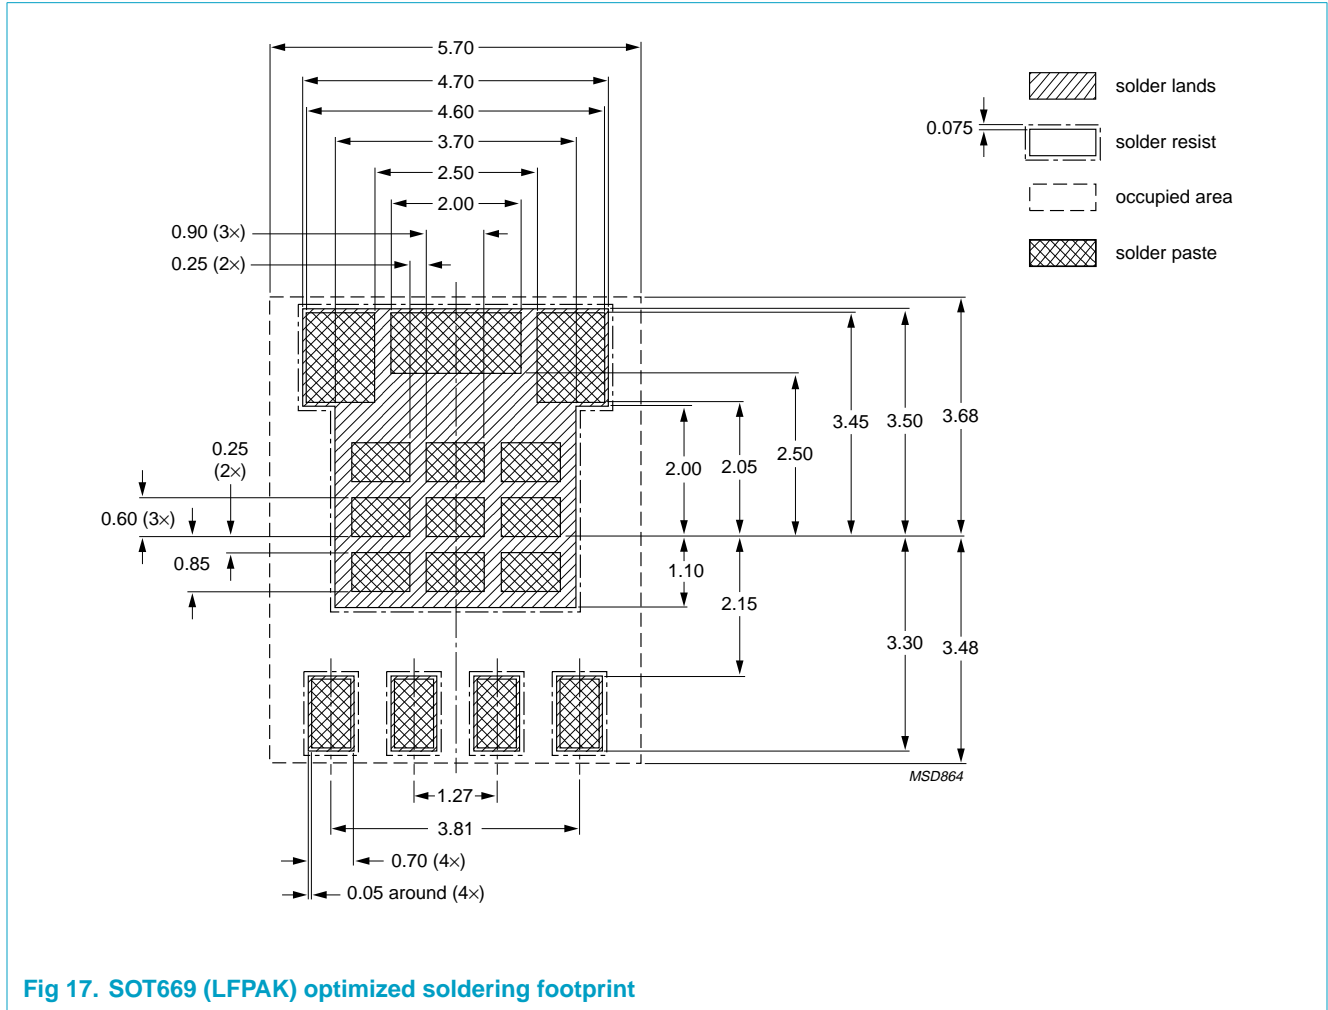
SOT669 (LFPAK) optimized soldering footprint
